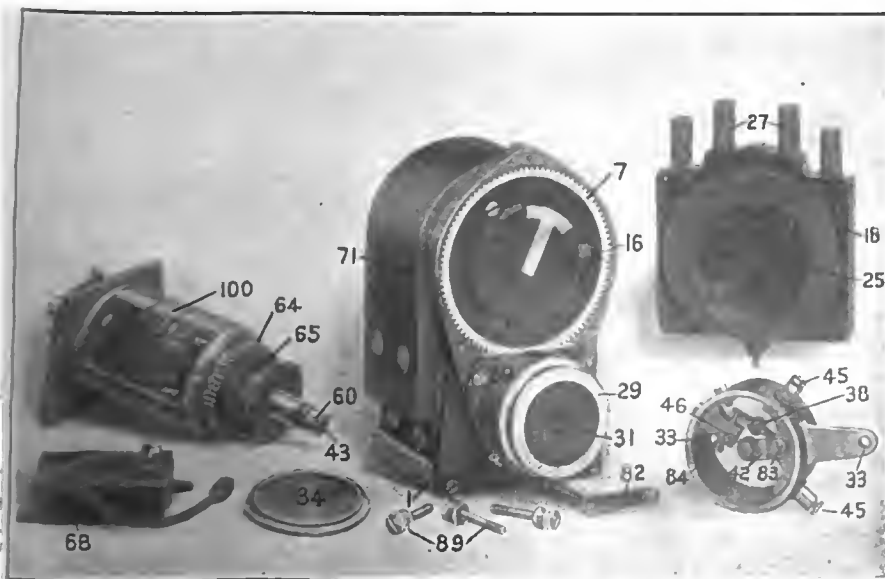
Volta magneto partly disassembled showing groups or units of parts
